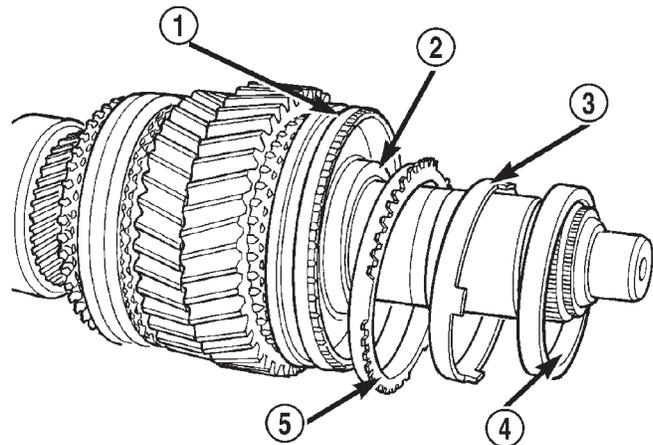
SECOND GEAR AND NEEDLE BEARING
